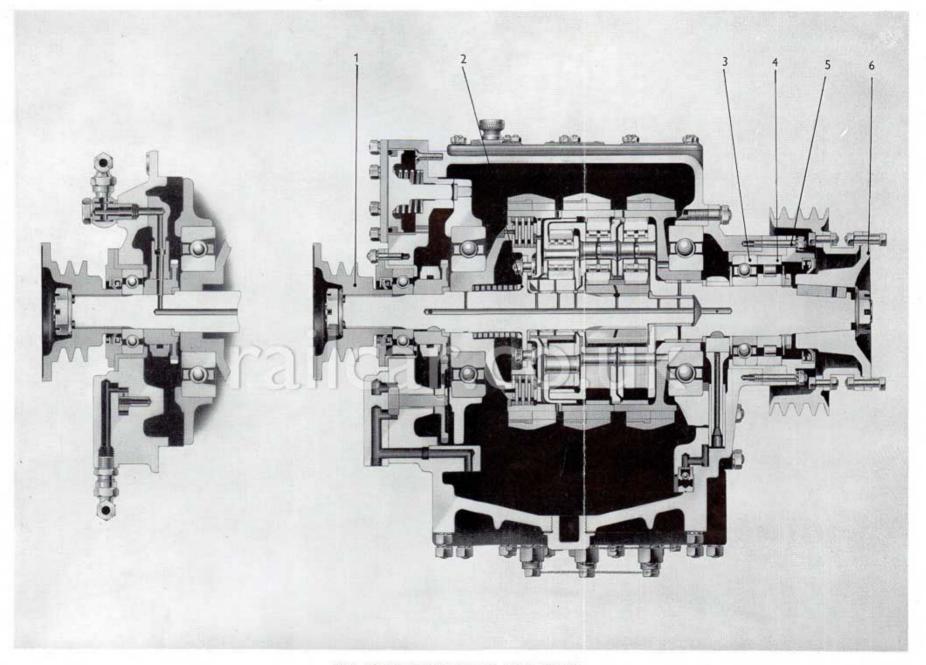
SECTION THROUGH GEARBOX. LIST No. 6230-6231.
